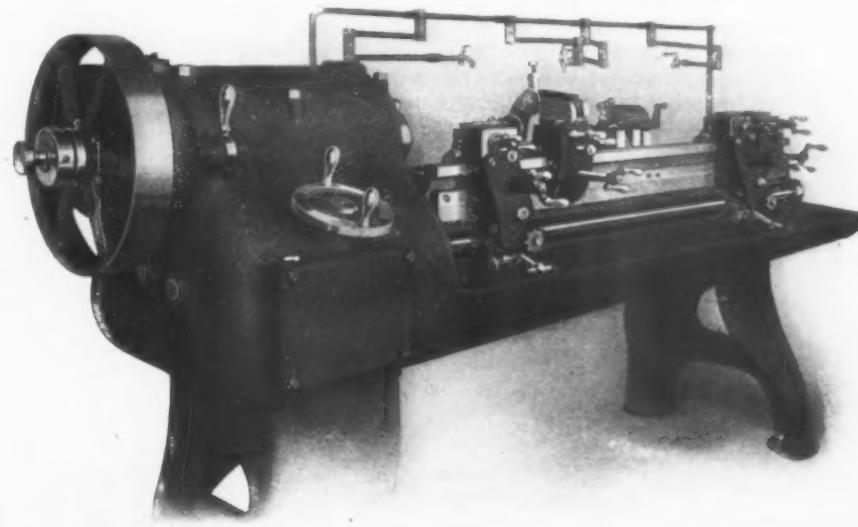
A Nearer View of the Inclosed Head Stock.
